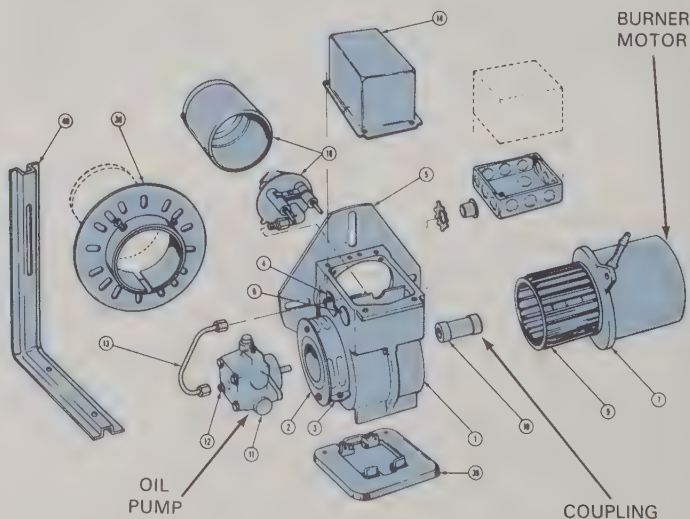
Exploded view of a gun-type burner assembly. Note the flexible coupling that connects the oil pump and the centrifugal fan motor.
